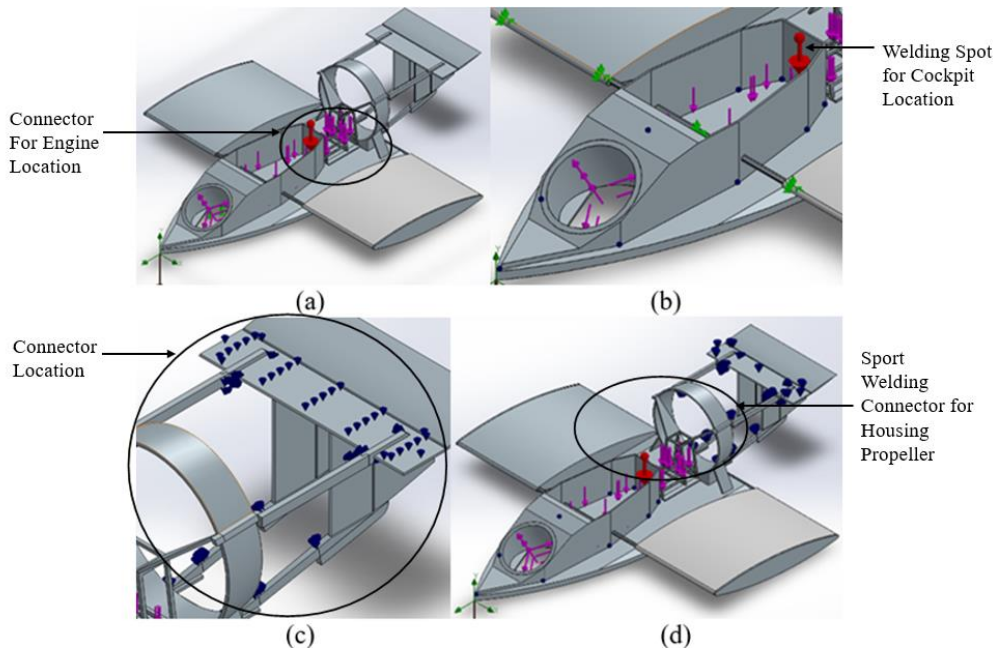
Joining definition: (a) global interaction; (b) spot welded cockpit; (c) rigid connector; (d) spot welded and rigid connector
